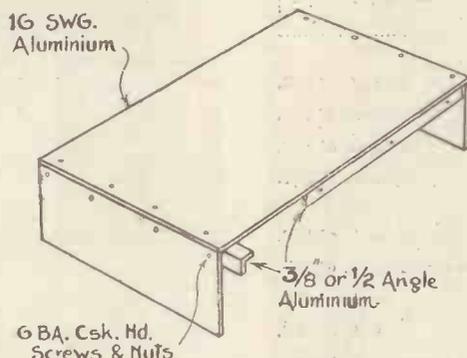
Simple metal chassis. Built up without any bending. Three straight pieces for top and sides with angle pieces for all the joints. You can buy angle aluminium—or brass if you like, more expensive
